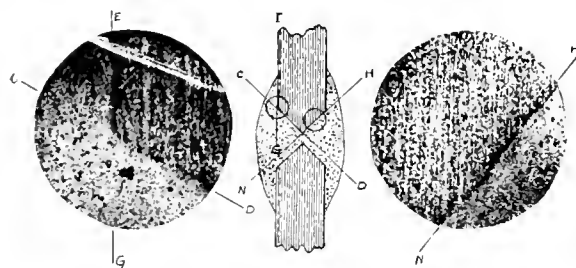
Sections of a Weld Made with 125 Amperes
